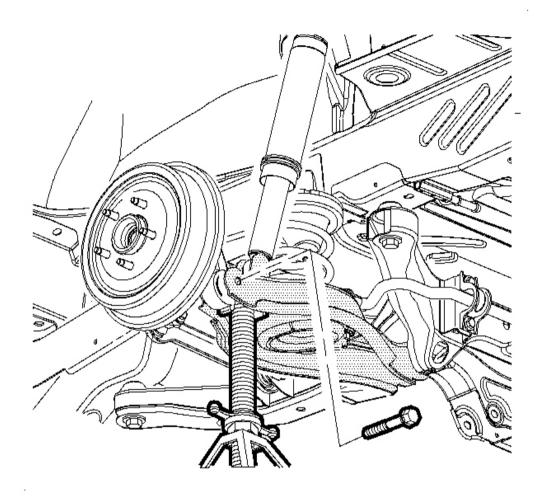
Lower Control Arm, Knuckle Nut & Bolt Courtesy of GENERAL MOTORS CORP.
